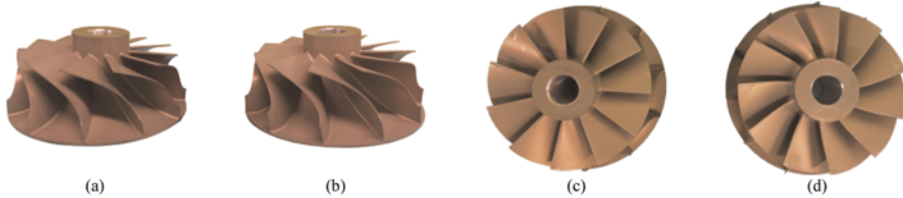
Manufactured rotor wheels: (a) front view and (c) top view of the radial fibre rotor, (b) front view and (d) top view of the non-radial fibre rotor.
